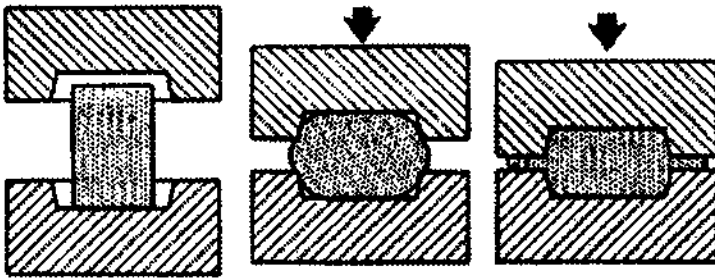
A4b Conventional impression-die (closed-die) forging sequence. (Courtesy Forging Industry Association.)
